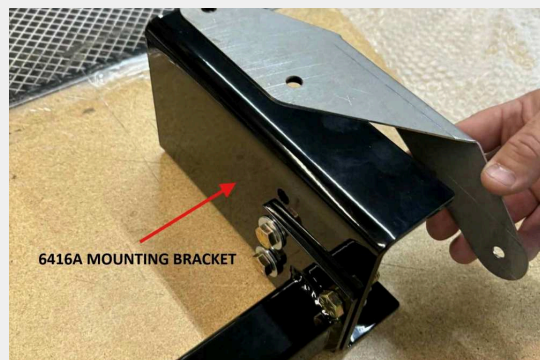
A: Installing 6416A Brackets. Shown with 6429PA template to show how 6416A bolts up to drilled holes.
